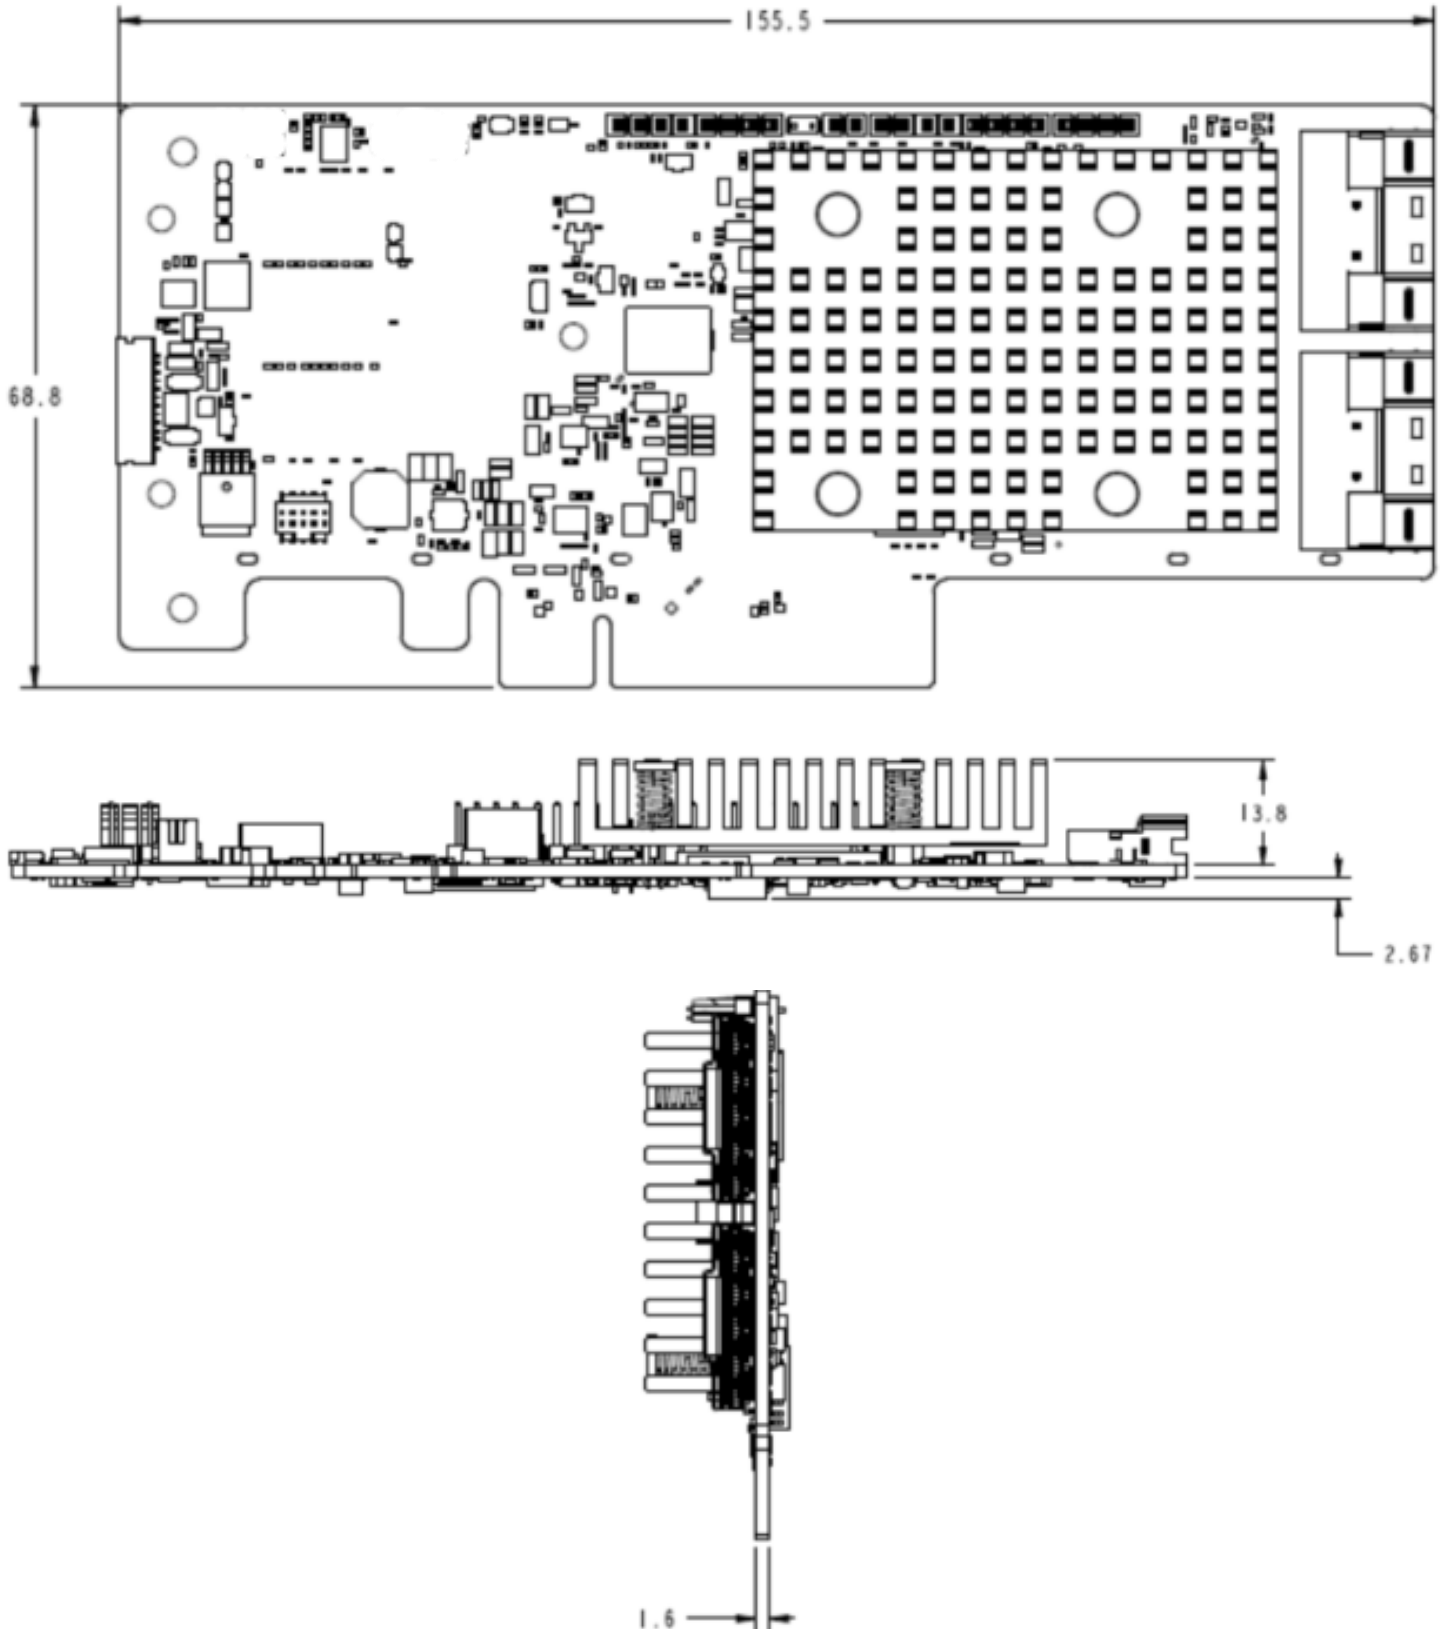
Intel® Storage Adapter RS3P4QF160J Dimensions
